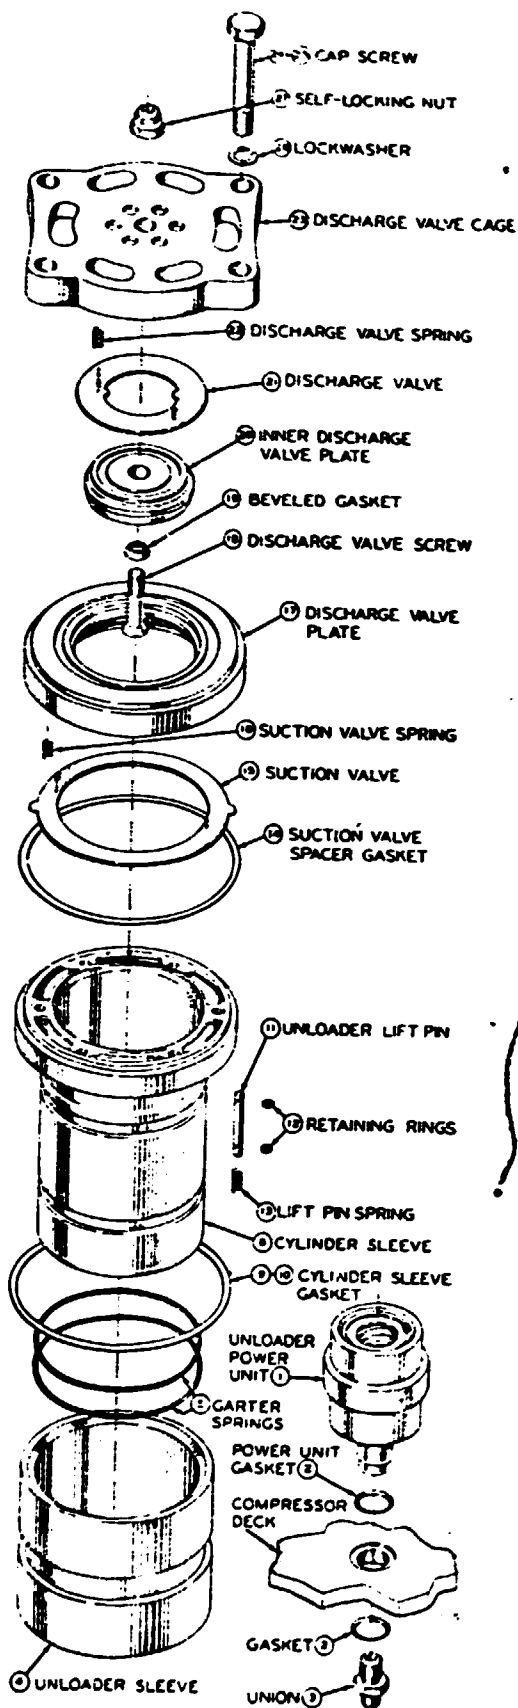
EXPLODED V.E.W. - CYLINDER SLEEVE AND VALVE ASSEMBLY
